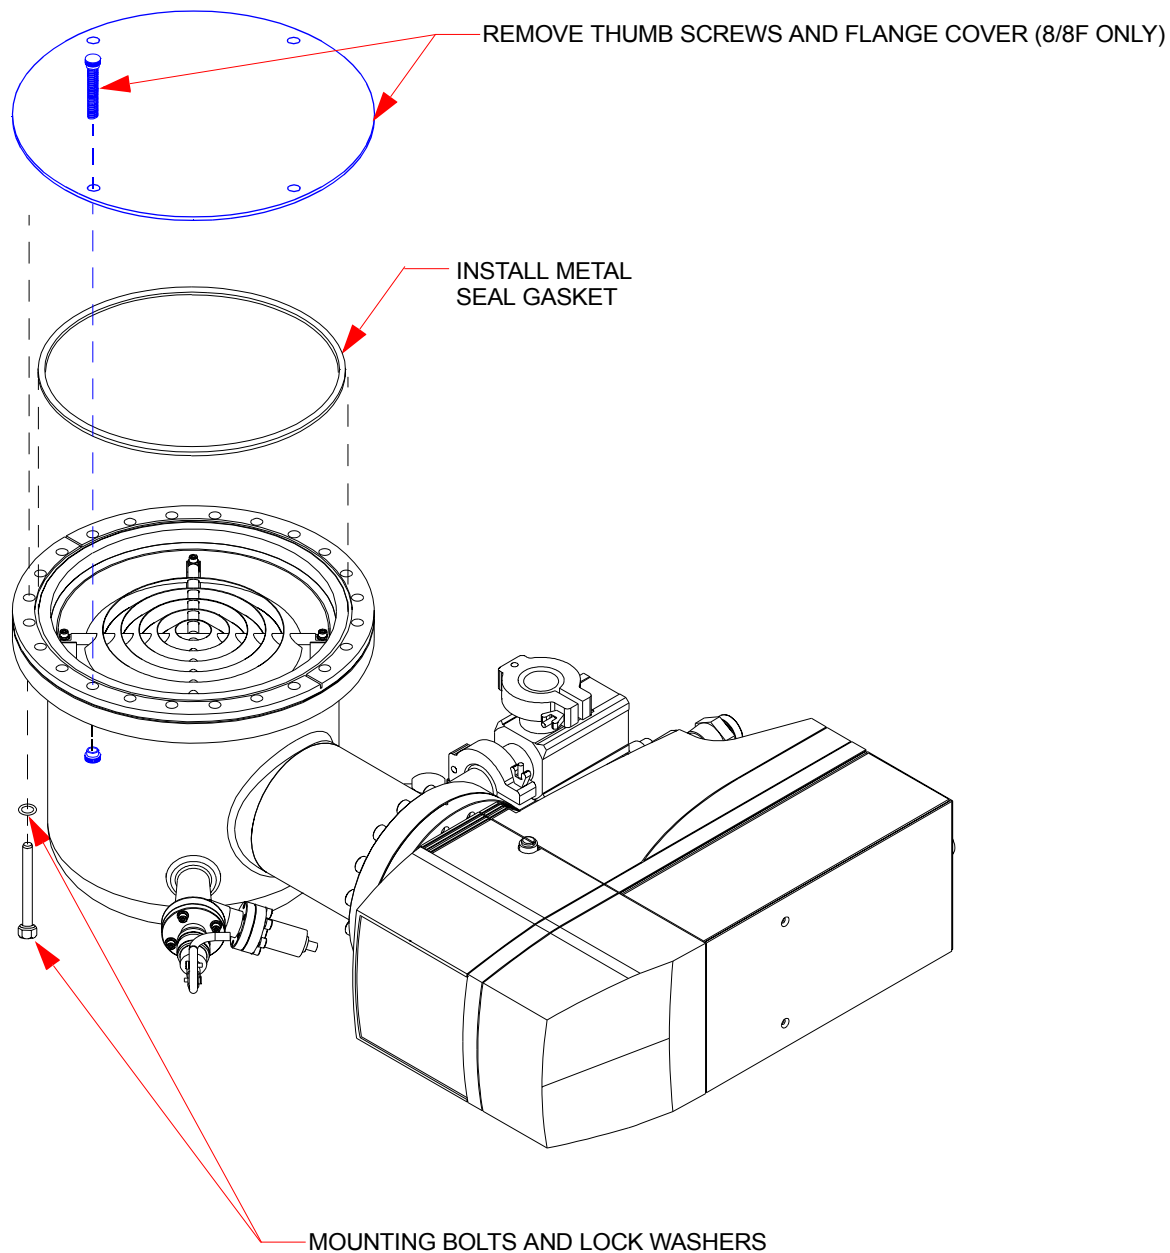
On-Board IS Cryopump and Metal Seal Gasket Installation (8F Cryopump)
